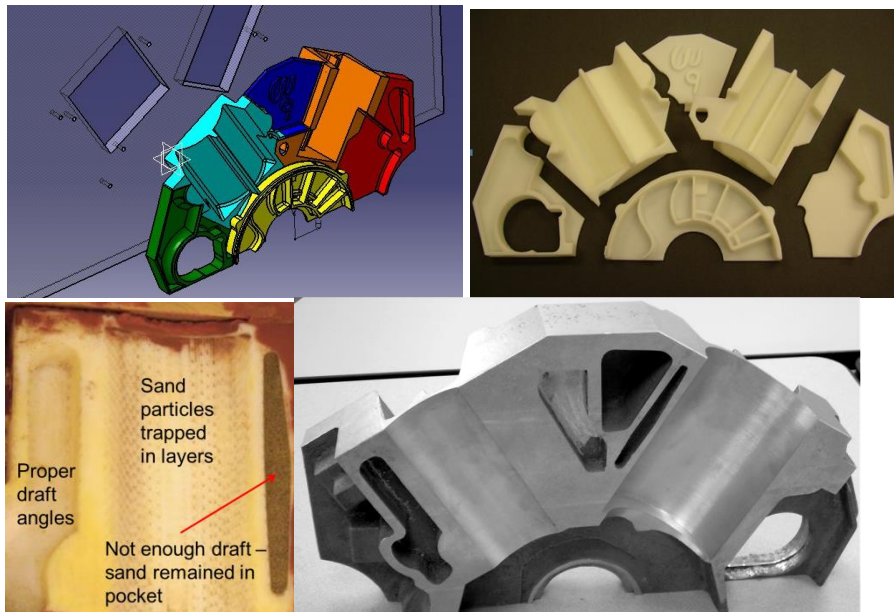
V6 block section modules, assembly (cope - top, drag - center), sample module (orange cope module), and final cast part, adapted from [14].
